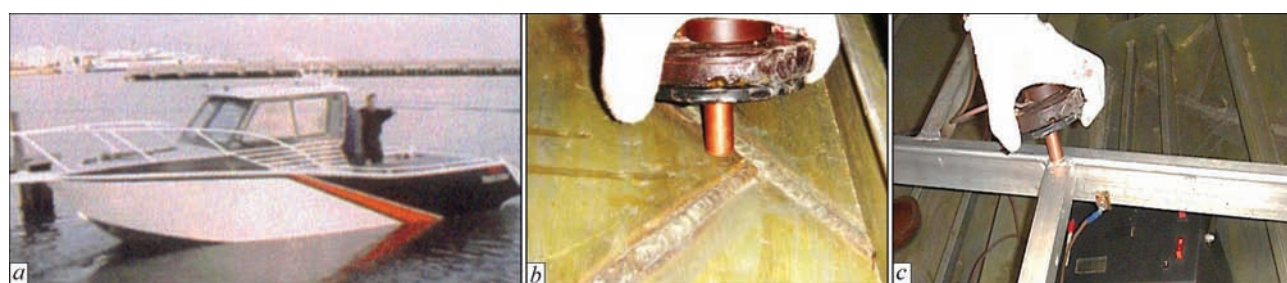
Using of EDT in the manufacture of ship hull of the AMg6 alloy: *a* — outer appearance of hull; *b* — EDT-straightening of welded joints of lining; *c* — EDT-straightening of the bottom beam structures
